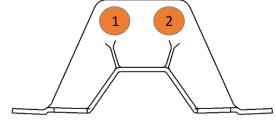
Sequential spot welding location and sequence for clip-frame joint
